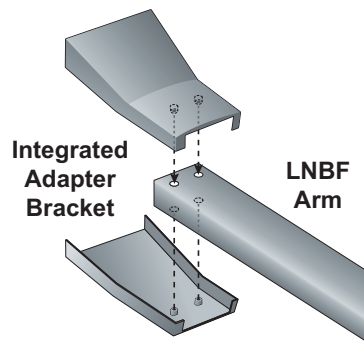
Bracket posts fitting into LNB arm (bolt holes removed for clarity)
